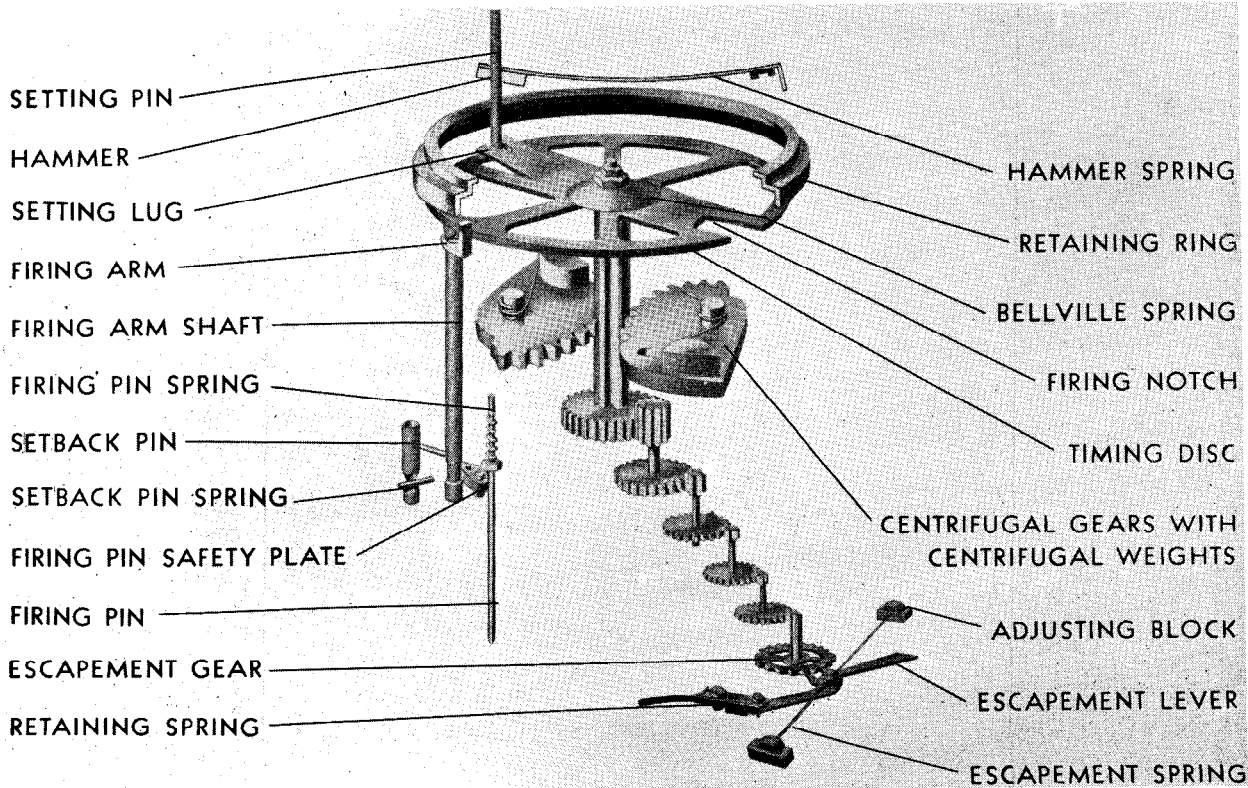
Mechanical Time Fuze Mk 25—Schematic View
